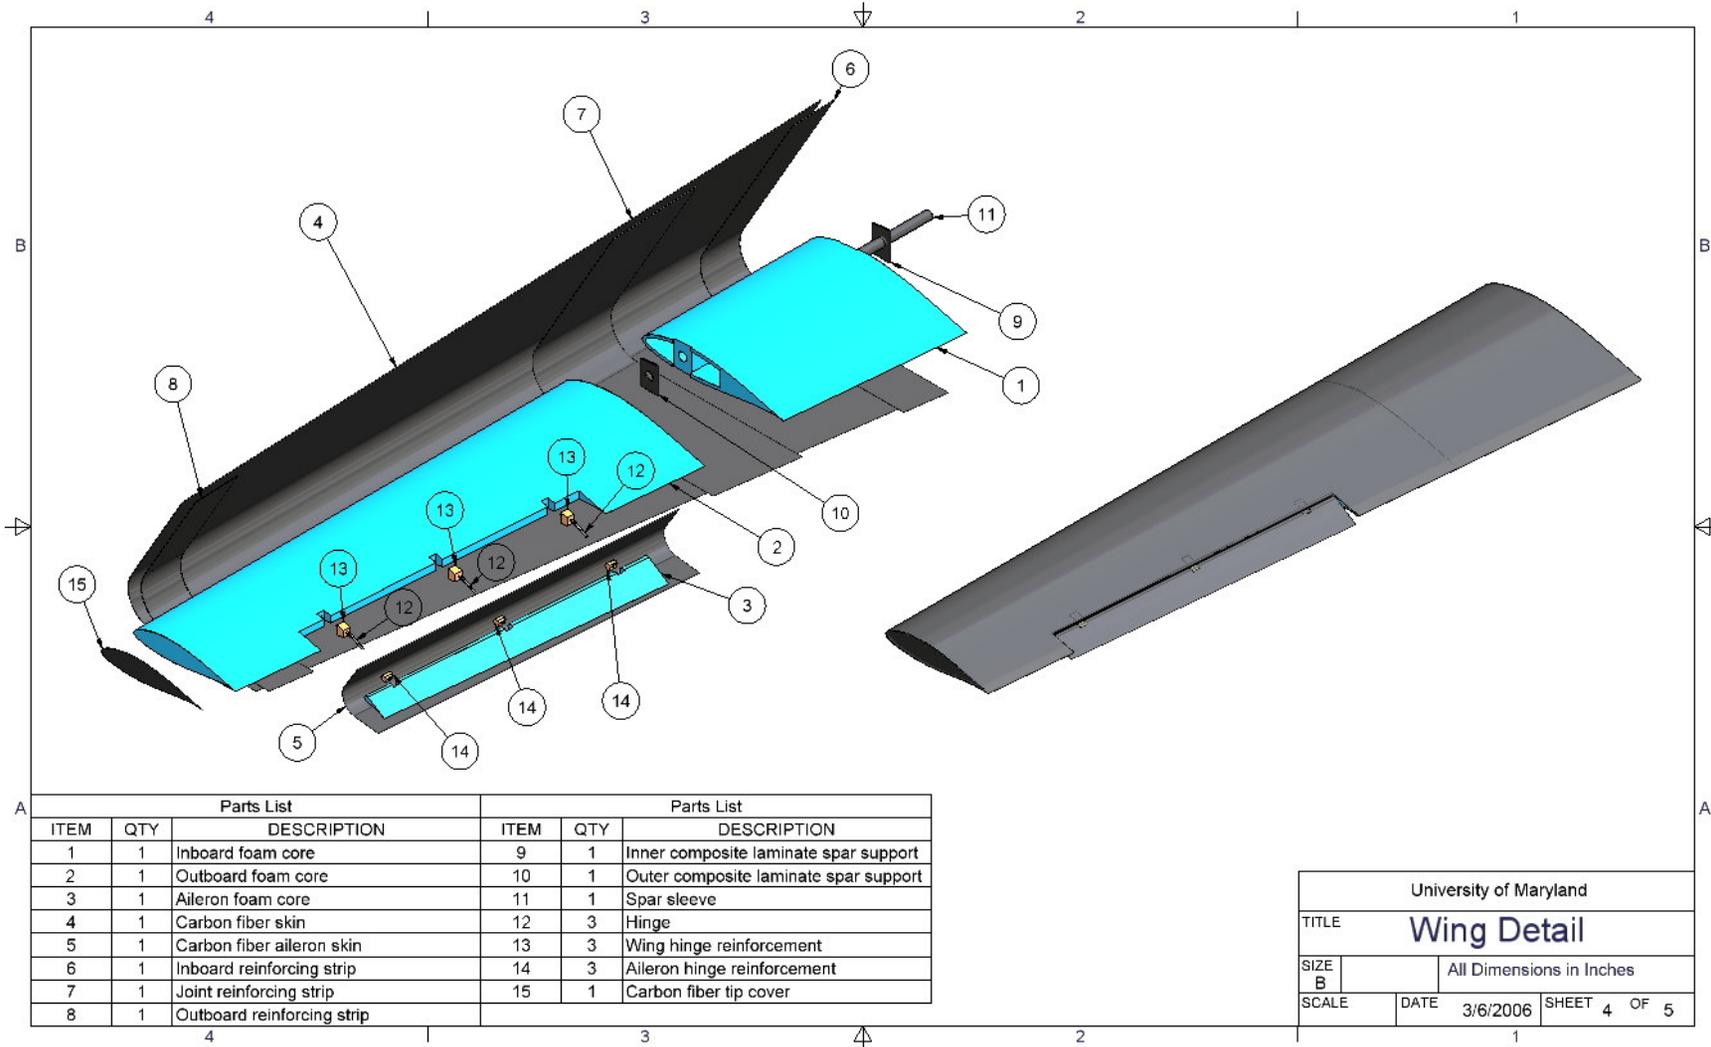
Detailed CAD Drawing – wing outboard-section assembly.
